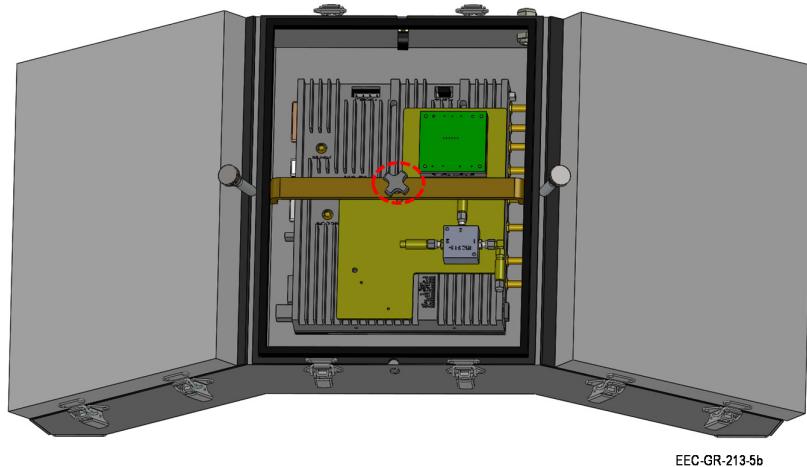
Plenum Assembly – IQ2-IFD Retaining Bracket
